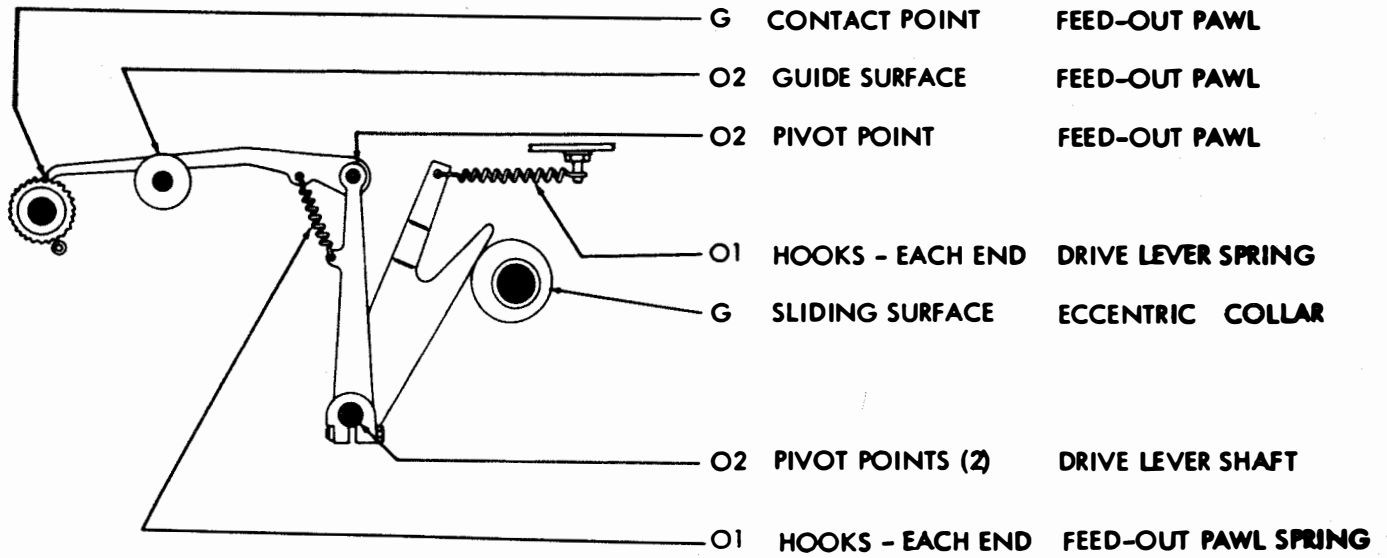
Feed-Out Pawl, Drive Lever, and Locklever on Remote Control Non-Interfering BLANK Tape Feed-Out Mechanism, Early Design
